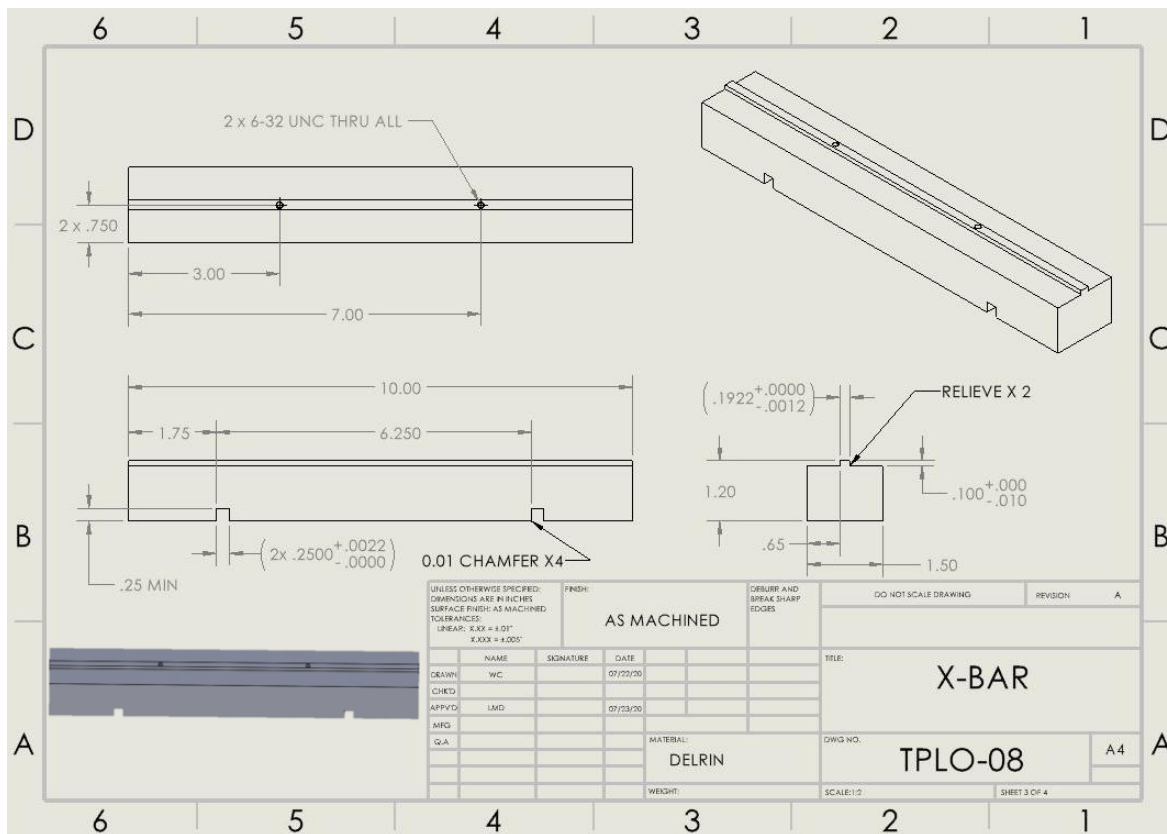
CAD drawing of X-Bar of the custom-built loading press for translation along the craniocaudal axis
